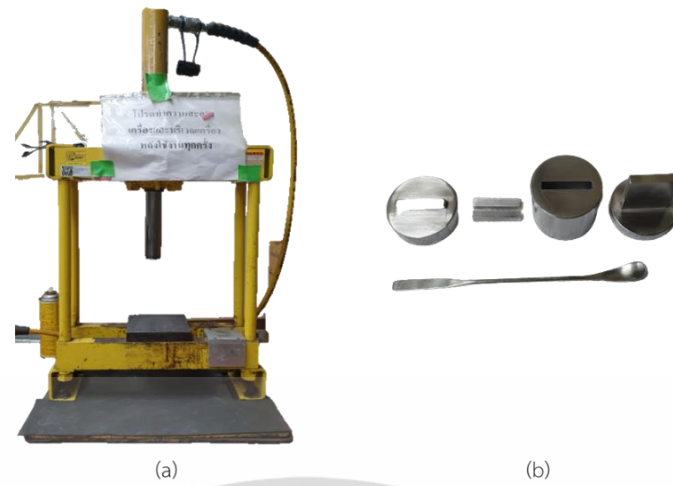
(a) Hydraulic pressing machine (IPH1240, ENERPAC), and (b) set of molds used in the forming process.
